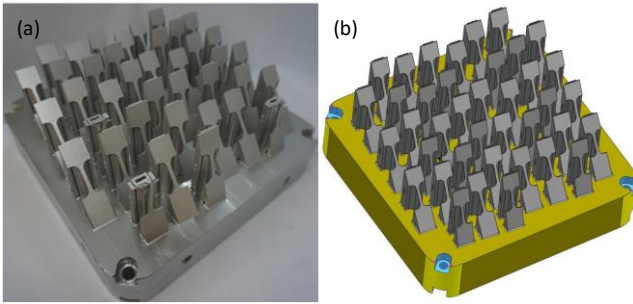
(a) Fabricated test specimens on build platform, (b) CAD model of the build layout.
